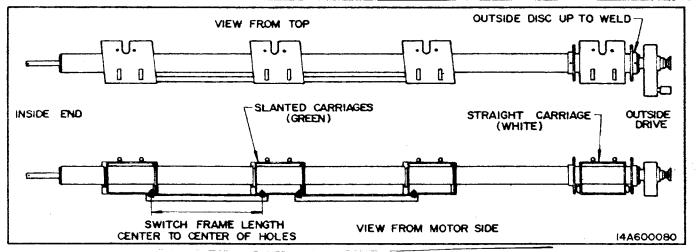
SWITCH FRAMES - OUTSIDE CARRIAGE
